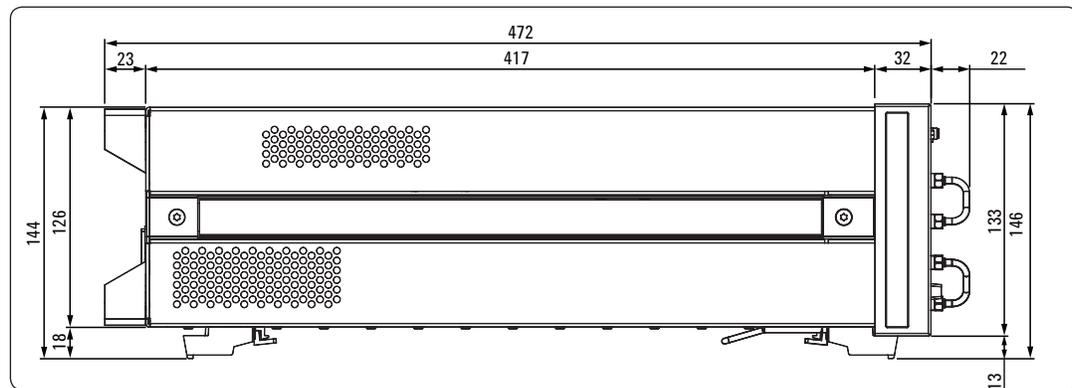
Dimensions (side view, with Option E5092A-020, in millimeters, nominal)
